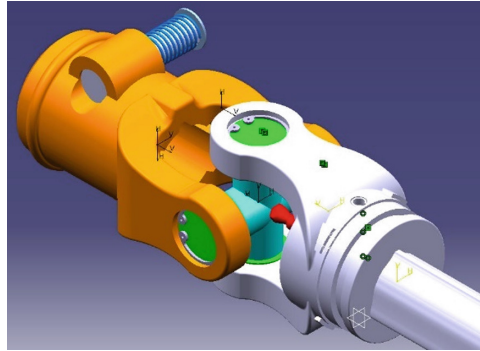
Tests of cardan joint bearings. (Source Authors)
